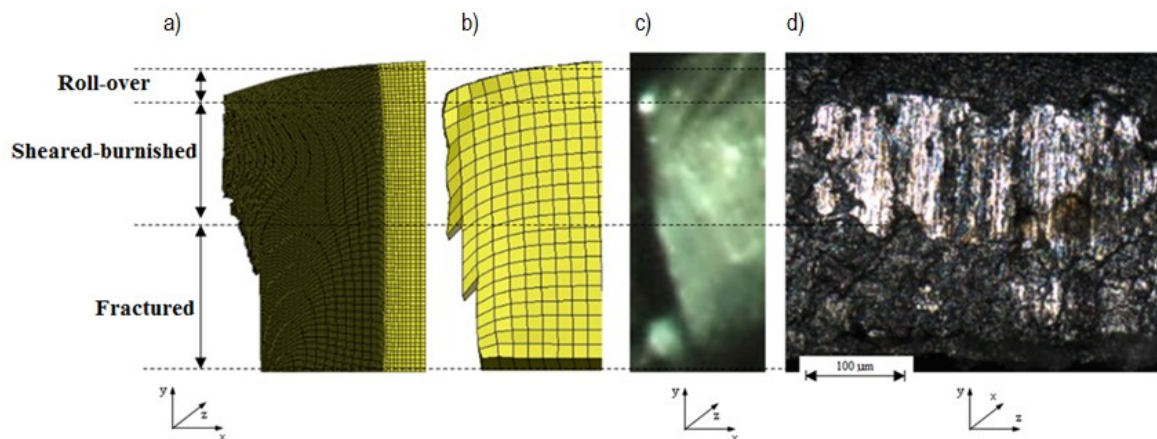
Analysis of selected features of the cut edge: (a) appearance of the cut edge for the 2D model, (b) appearance of the cut edge for the 3D model, (c) appearance of the cut edge obtained experimentally, (d) image of the surface of the cut edge
